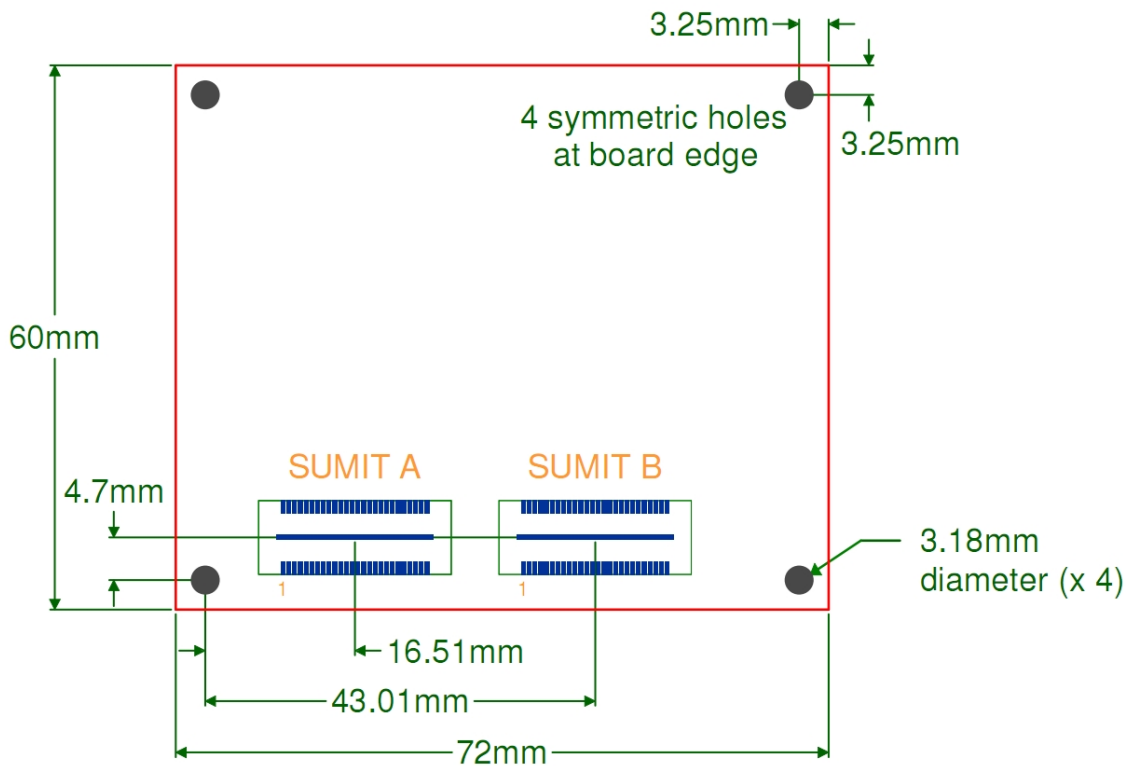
Physical Dimensions and SUMIT Connector Placement on a Pico-I/O Module
